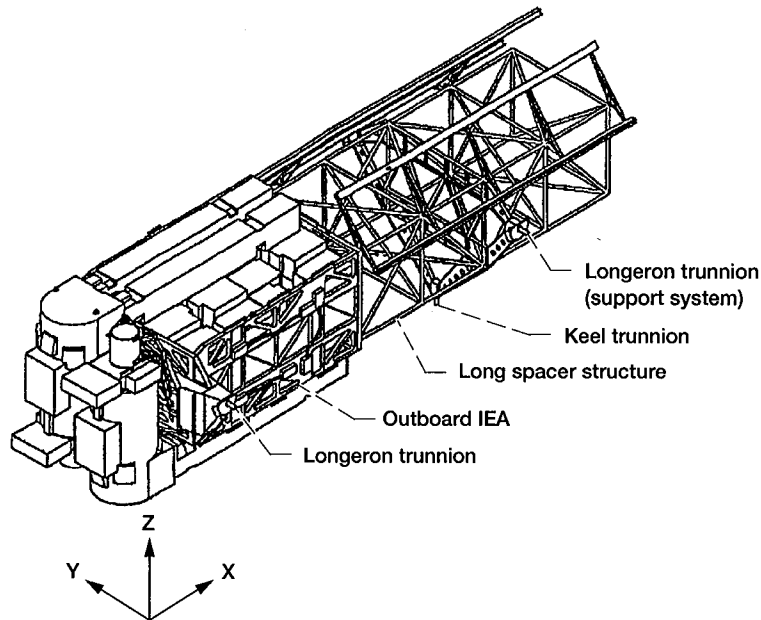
Configuration of long spacer structure and integrated equipment assembly.
